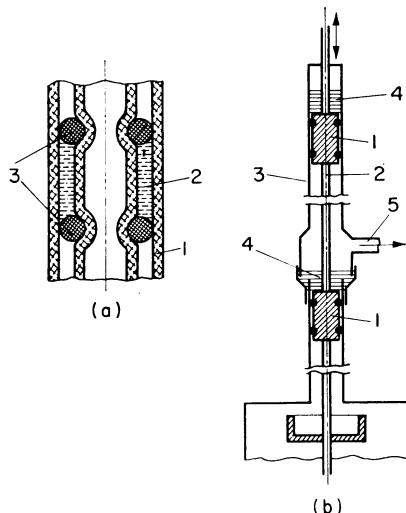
Oil-lubricated O-ring seals for transmitting motion: (a) sliding joint between two concentric pipes (after Gore¹⁶²); (b) double piston sliding seal. After Lake^{729a} (*Courtesy of The Institute of Physics and The Physical Society, London*)
